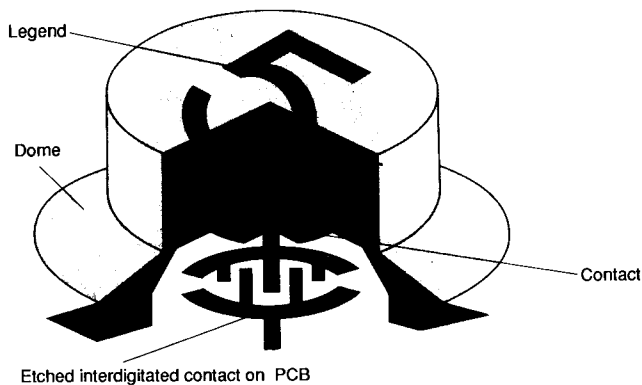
One method of securing the molded switch matrix to the PCB. (Courtesy of Memtron Technologies, Inc., Frankenmuth, Mich.)
